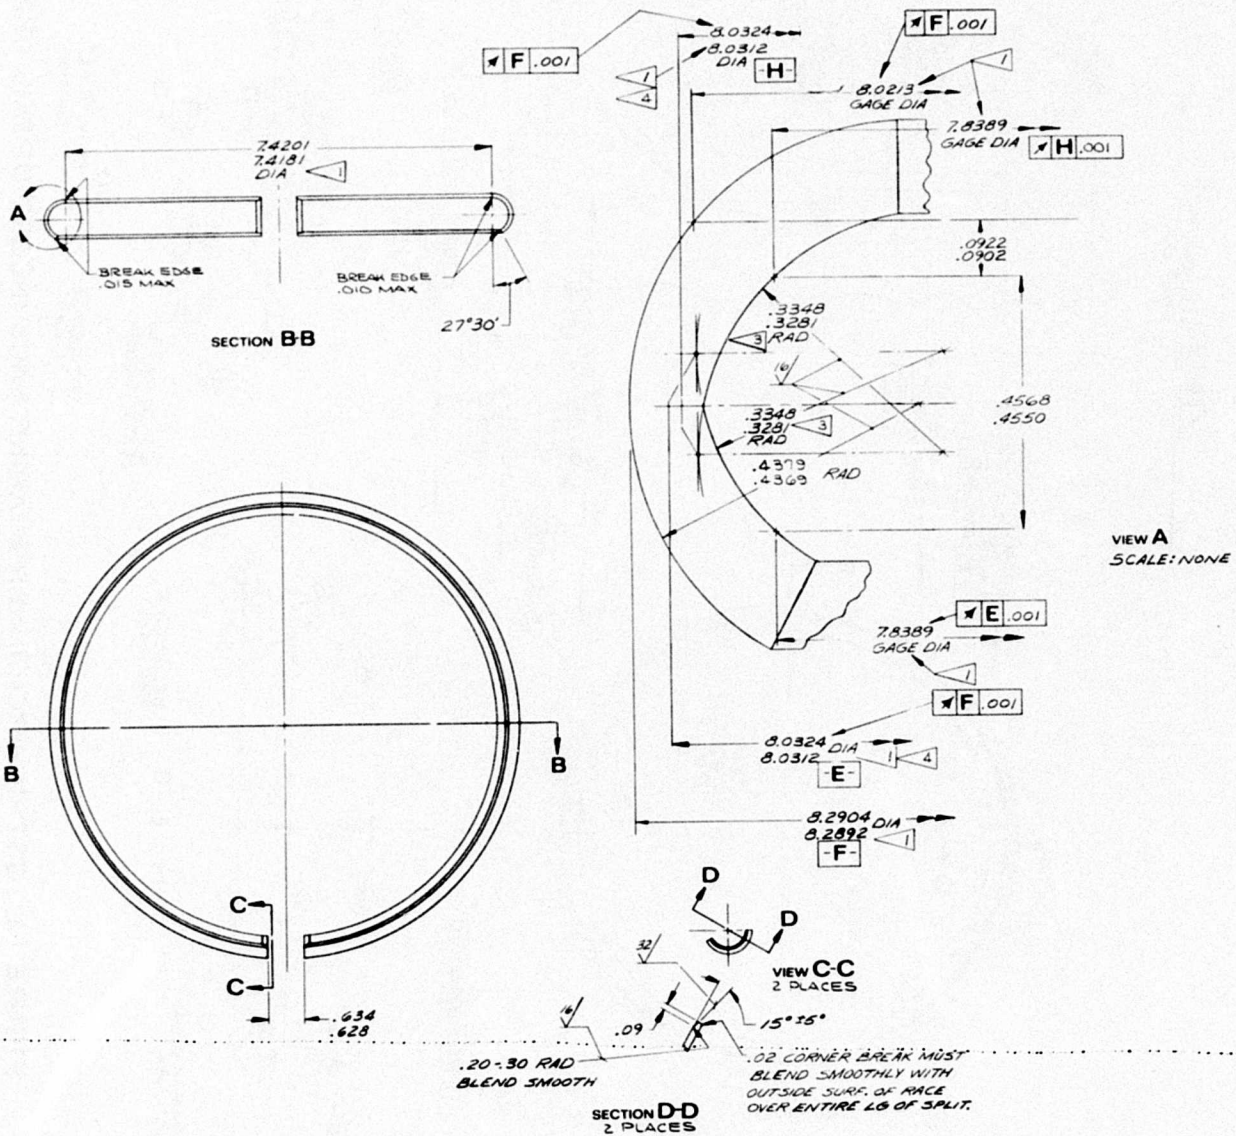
GOTHIC-ARCH OUTER BEARING RACE INSERT DETAIL DRAWING
